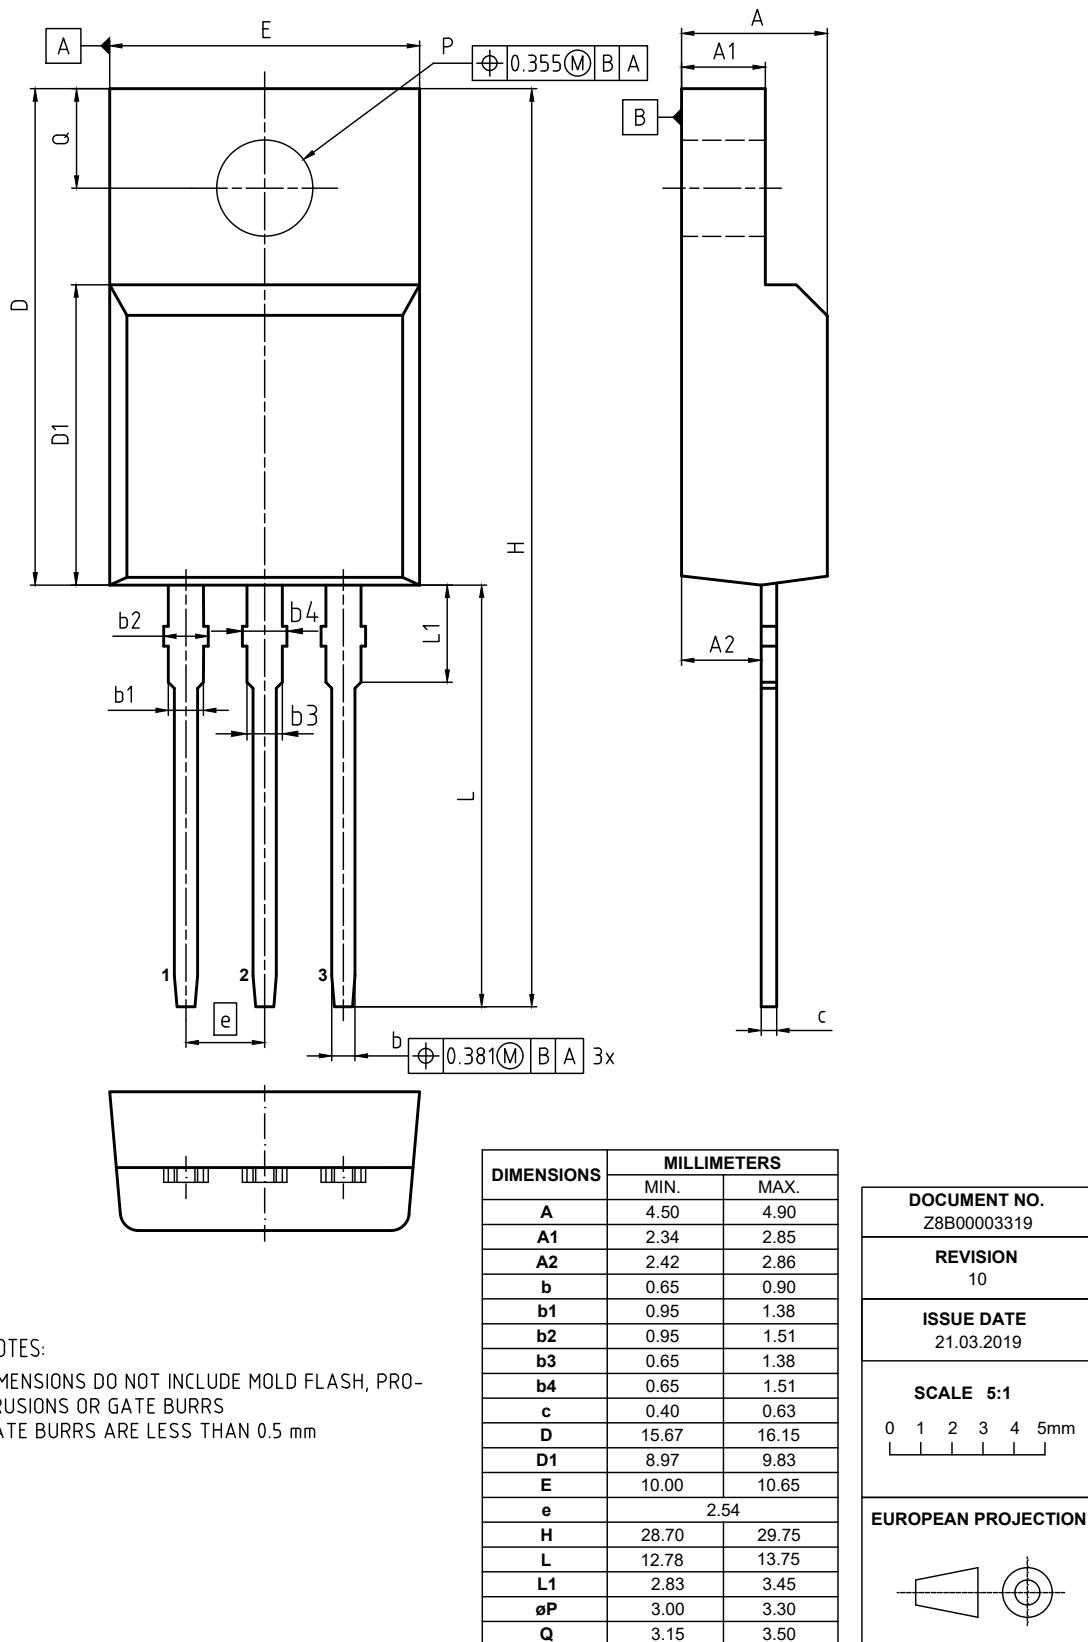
Outline PG-TO 220 FullPAK, dimensions in mm
